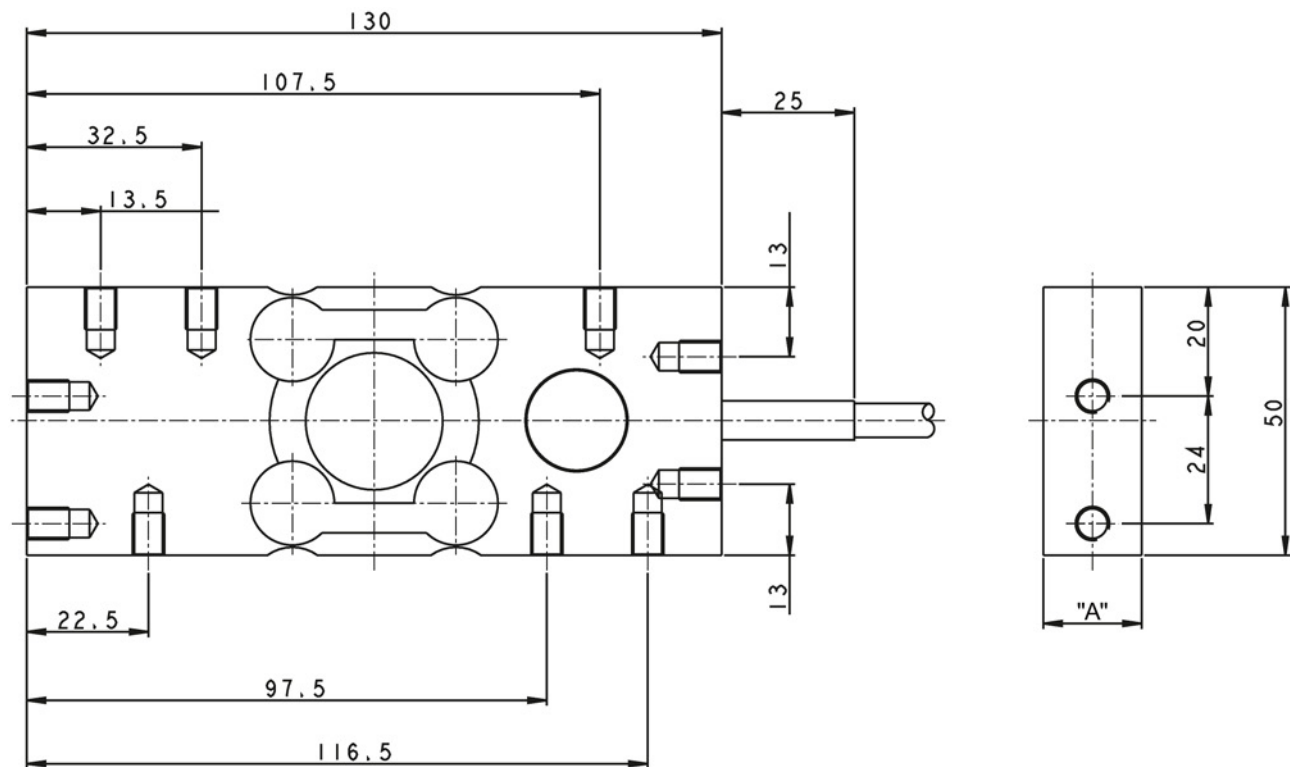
Dimensional drawing SIWAREX WL260 SP-S SB
